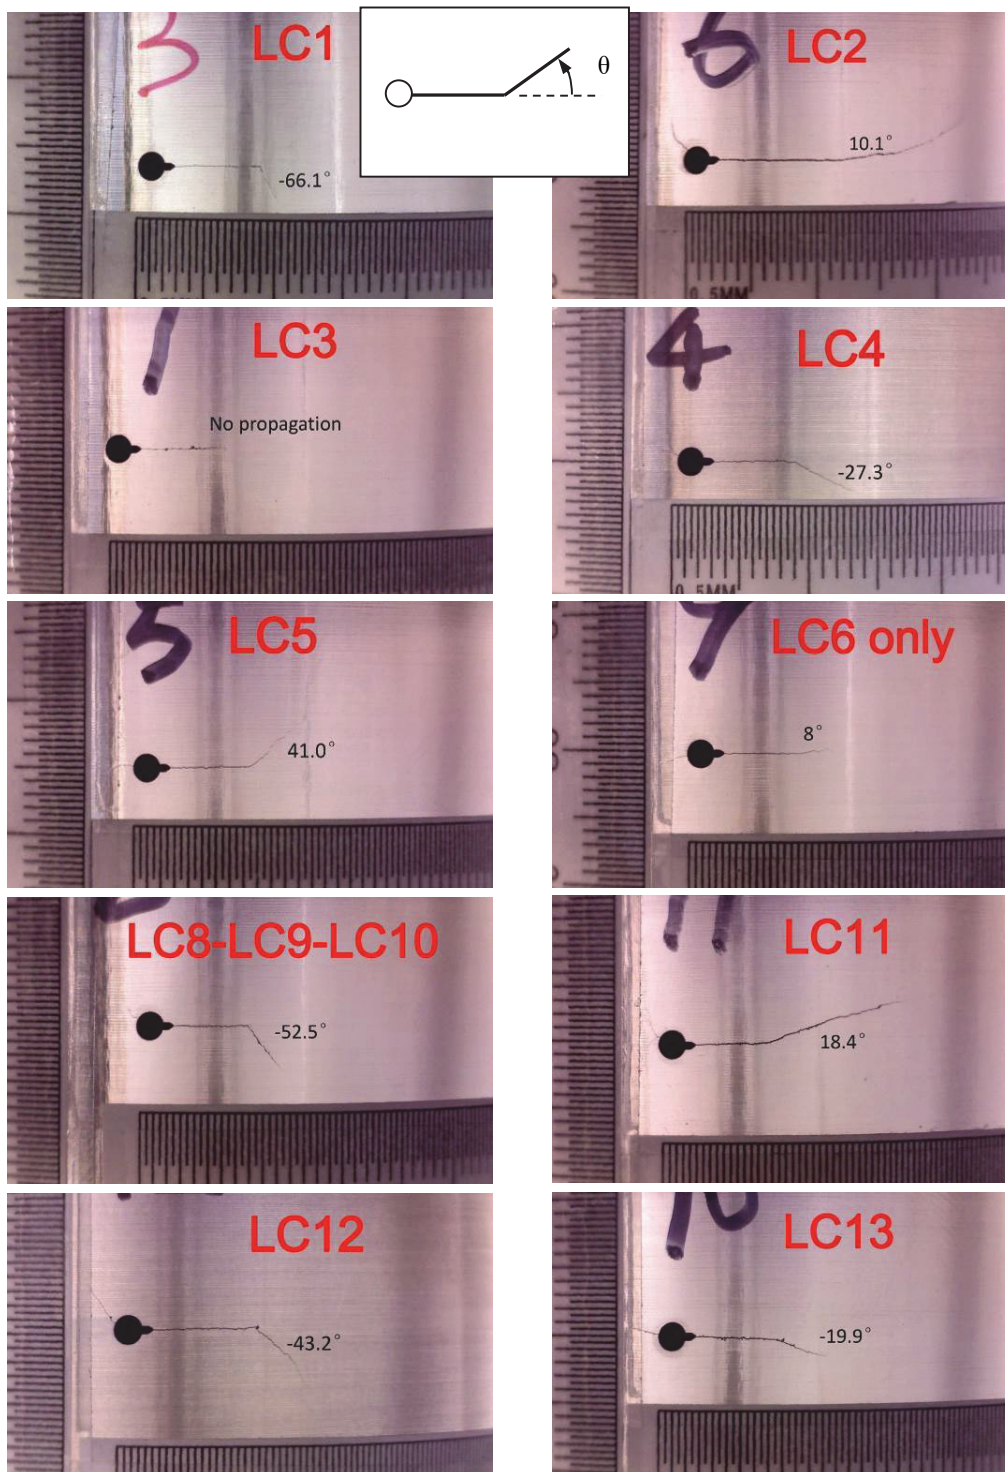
Fatigue cracks at the outer surface of tubular specimens at the end of tests.
